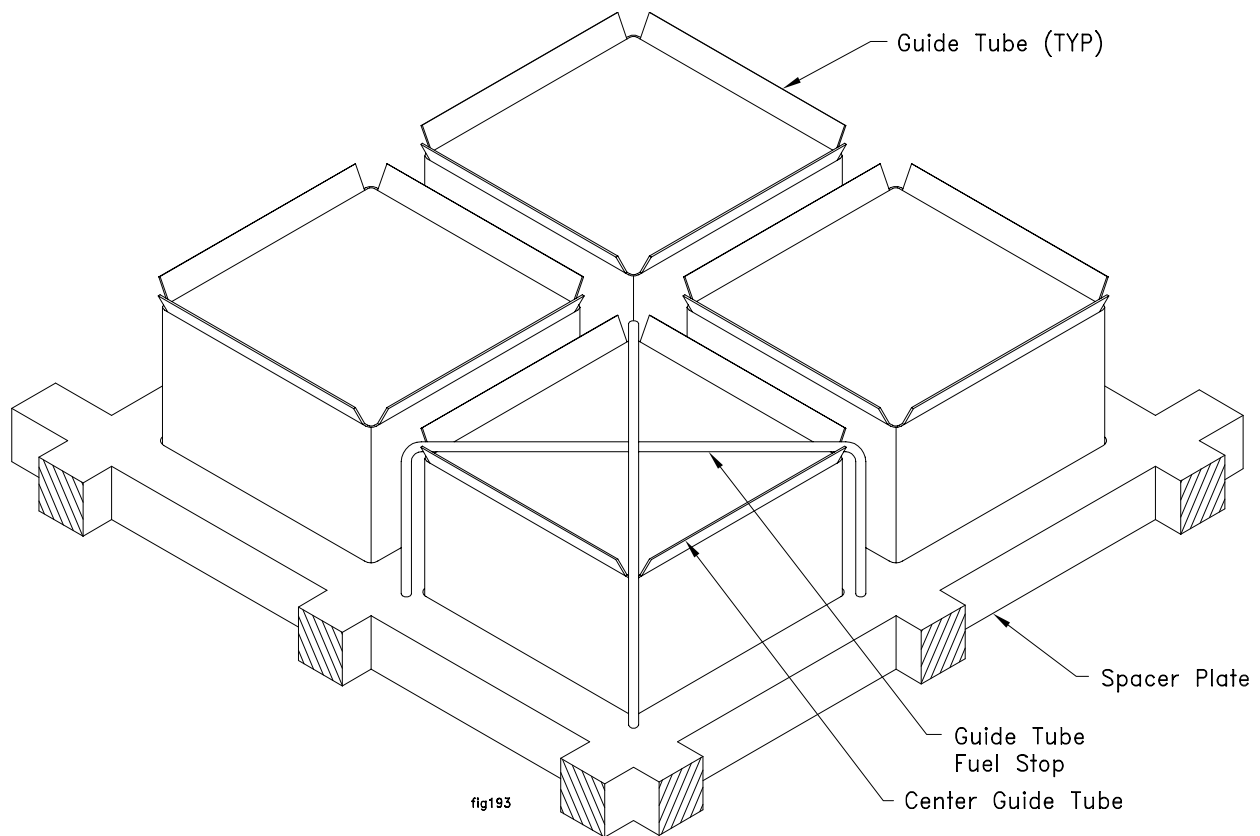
FuelSolutions™ W21 Canister Basket Center Guide Tube Fuel Stop Arrangement for Partial Loading Configuration
